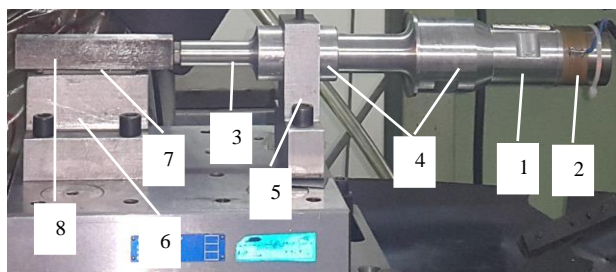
Ultrasonic assisted grinding setup: 1) transducer, 2) piezoelectric rings, 3) horn, 4) booster, 5) transducer fixture, 6) workpiece fixture, 7) linear bearing, 8) workpiece.
